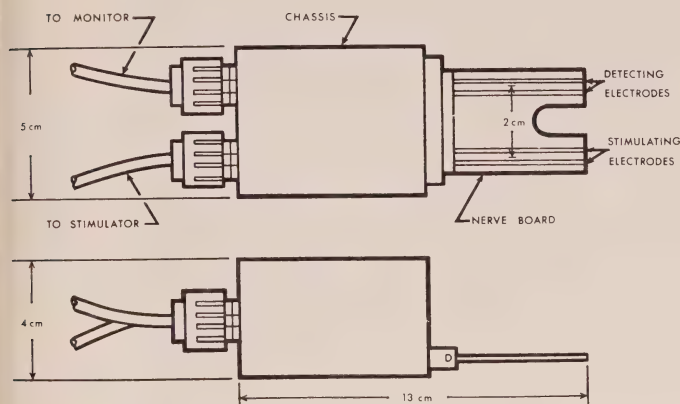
Schema of Top and Side Views of Nerve Board Apparatus
